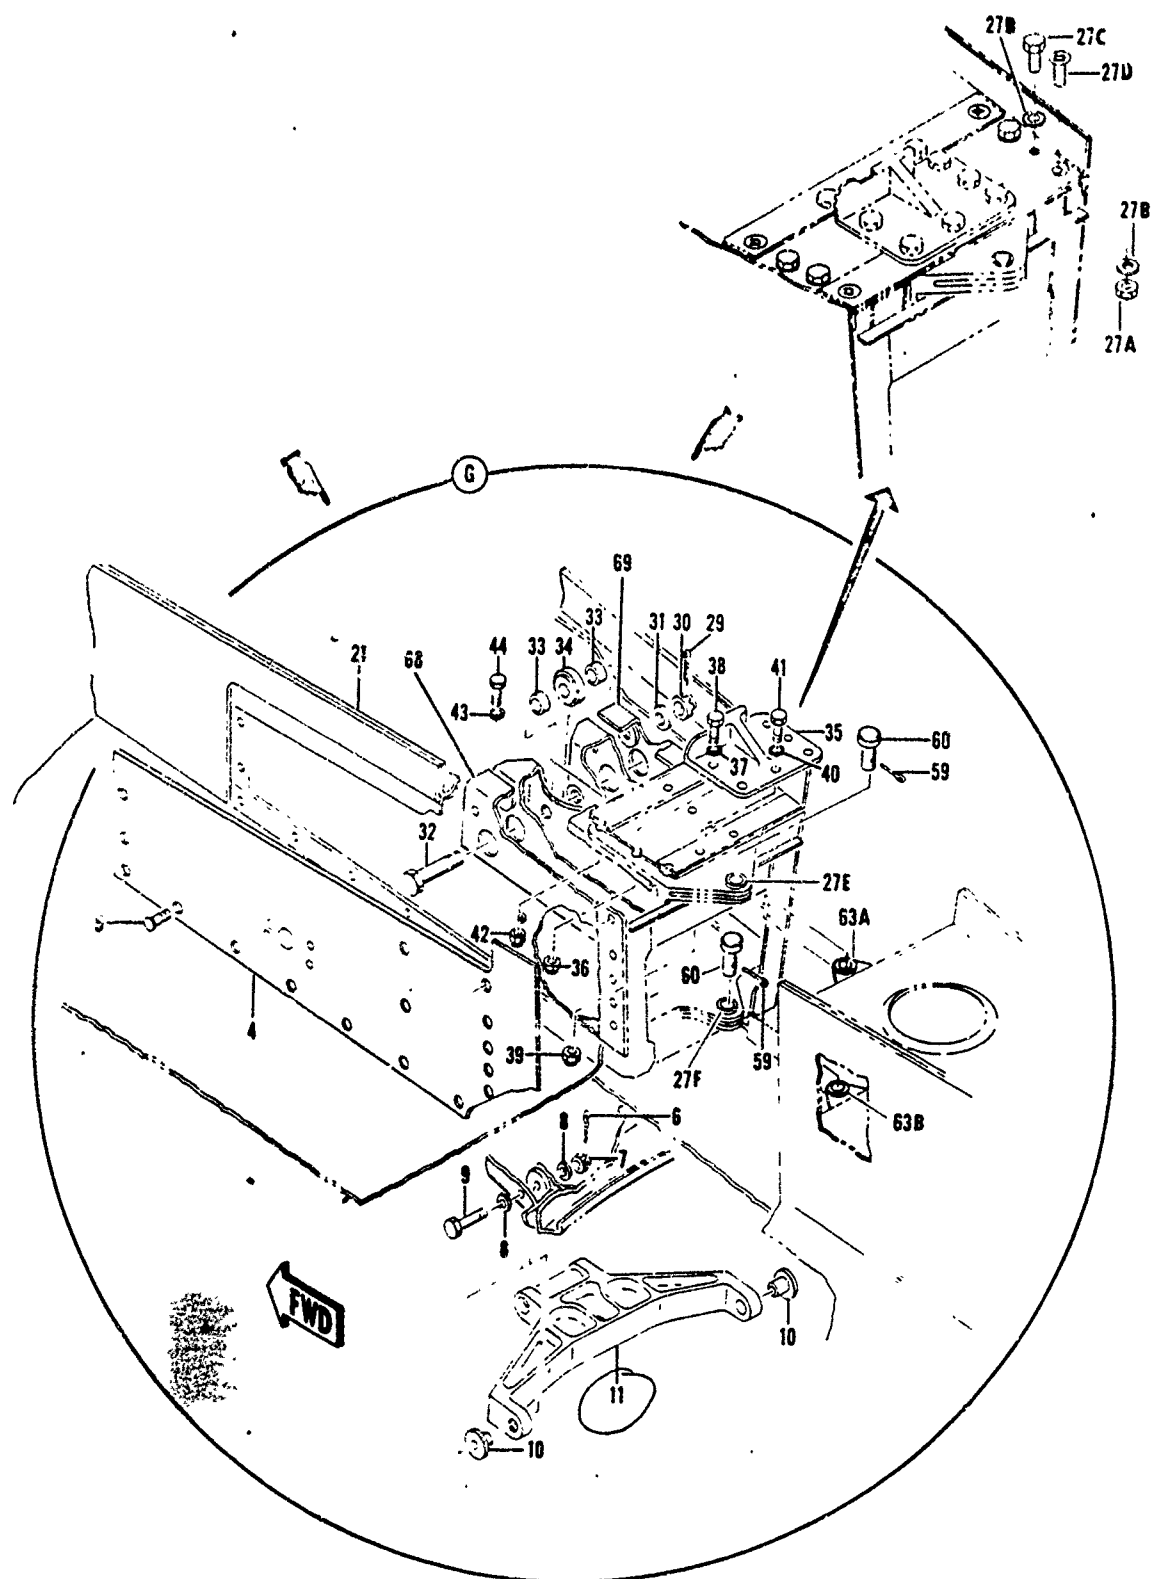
Aft Thrust Reverser and Sleeve Assembly (Sheet 3 of 3)
